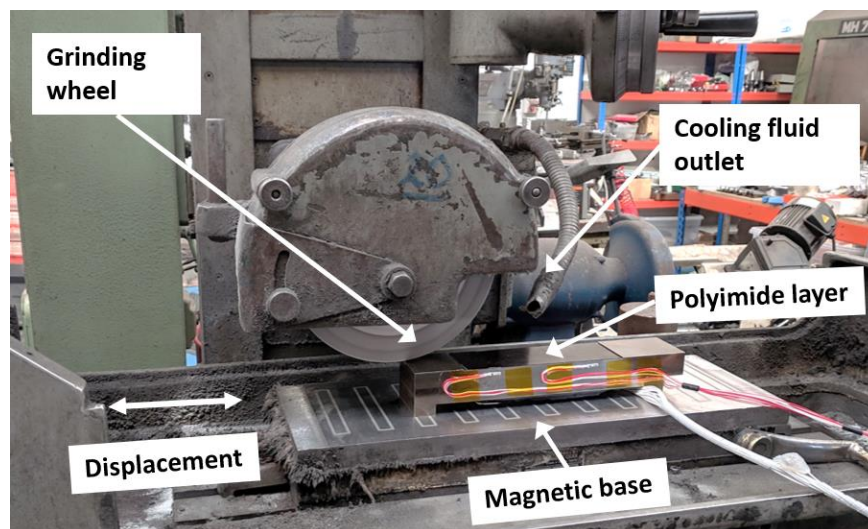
A photograph showing the steel specimen on the magnetic base with the grinding wheel in place.
